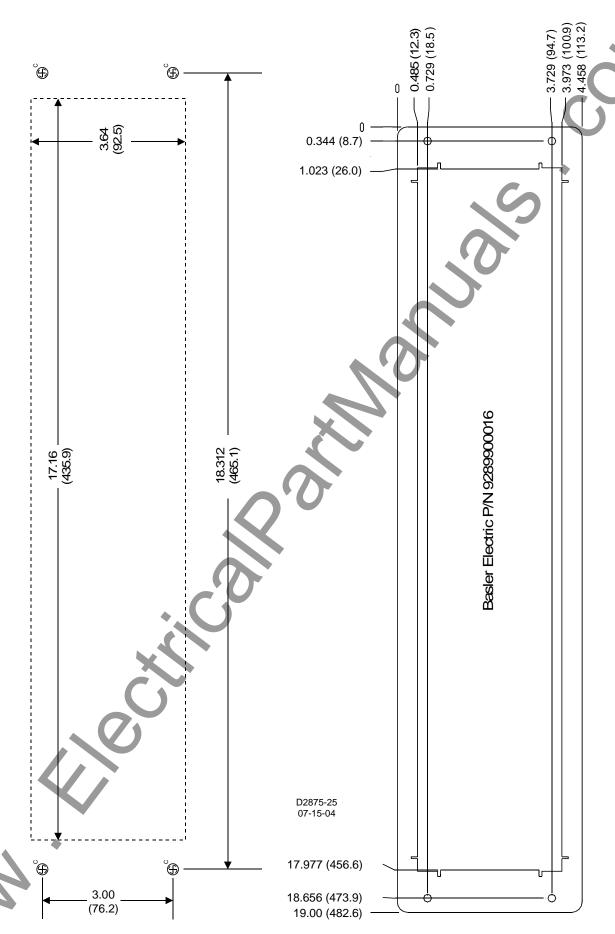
H1 Case, Two-Relay Mounting Plate Dimensions
